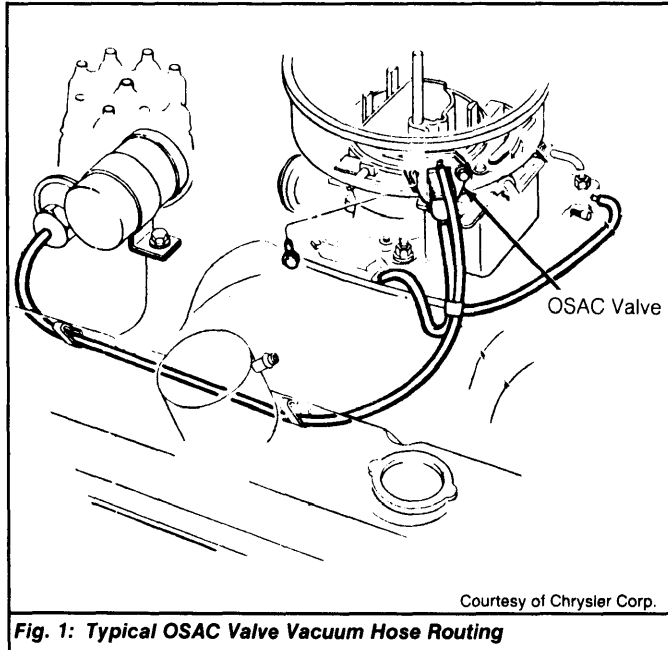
Typical OSAC Valve Vacuum Hose Routing
